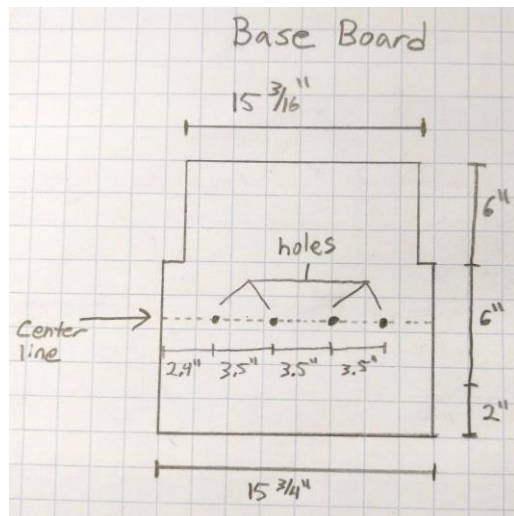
Finish Gate Base Board Dimensions-- Created by Chris Fabbri
